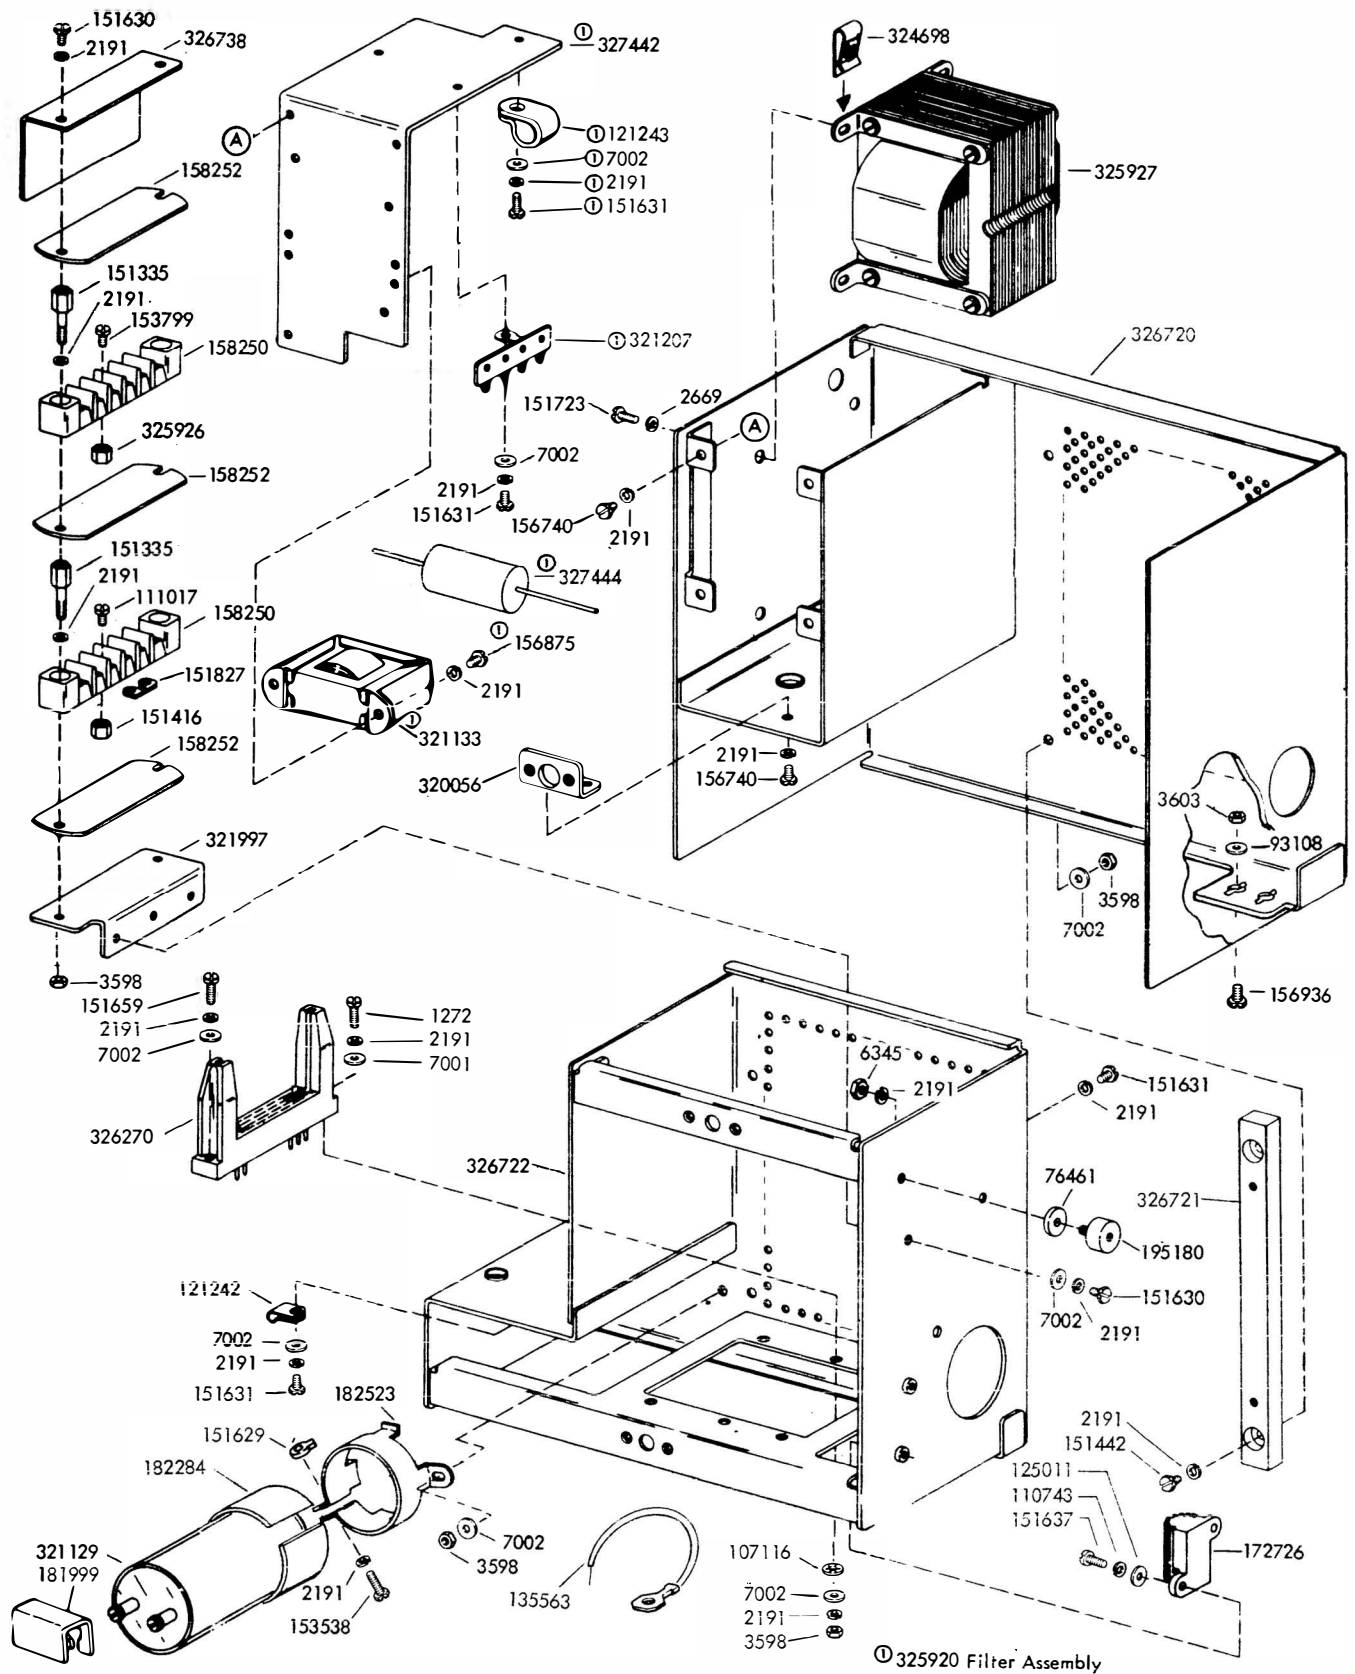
325919 CONTAINER ASSEMBLY (Continued)
